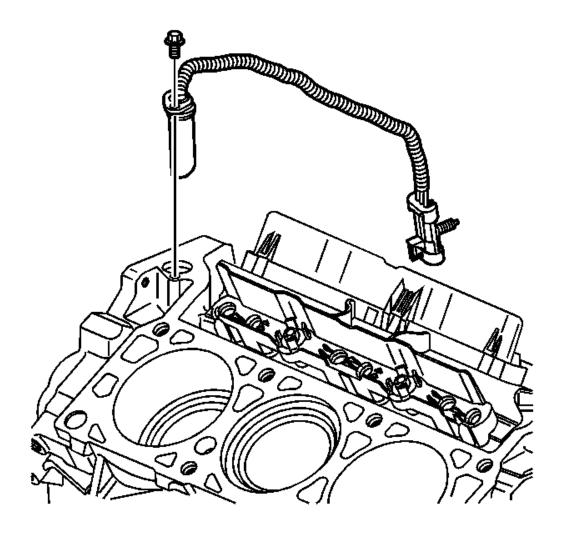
Removing Camshaft Position Sensor & Bolt Courtesy of GENERAL MOTORS CORP.
